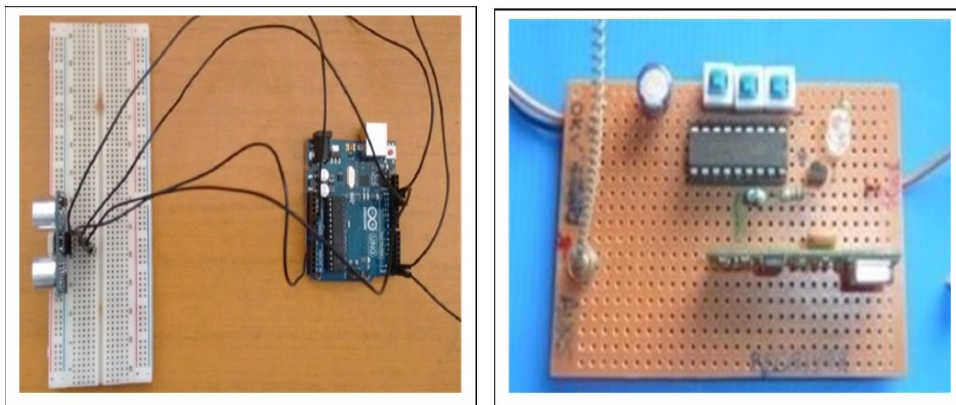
Diagrams, Showing the Components on Bread Board and Soldering on Vero Board
